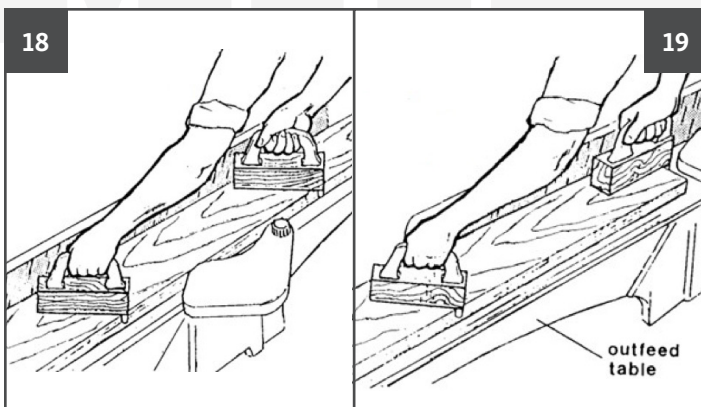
MOVE LEFT HAND TO OUTFEED SIDE
